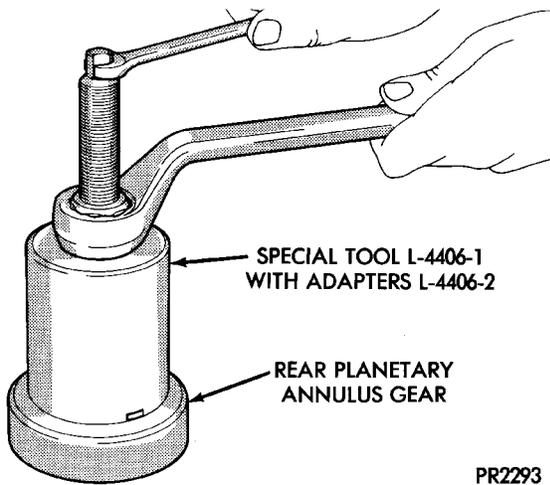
Remove Rear Planetary Annulus Gear Bearing Cone
